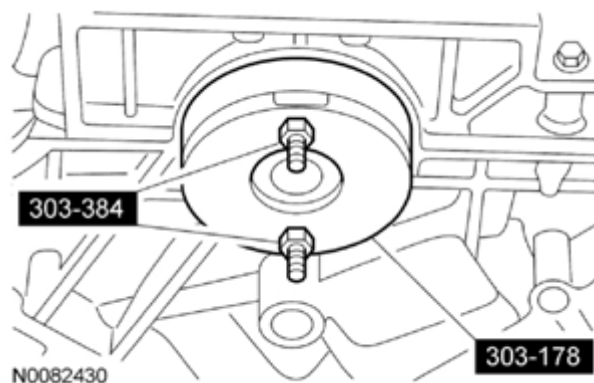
Installing Rear Main Oil Seal Using Crankshaft Rear Main Oil Seal Installer
